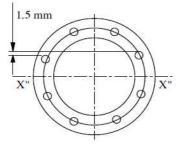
Tolerances for prefabricated piping assemblies
